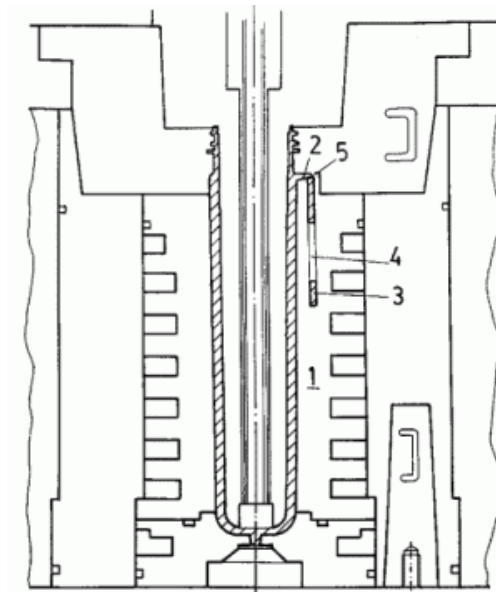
Blowing mold and bottle neck production by compression of the material by the blowing bolt.
